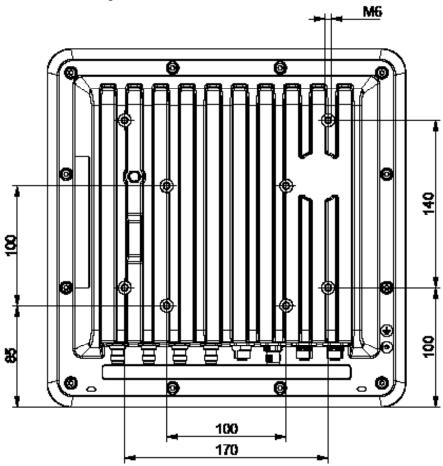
RRU 4xxx and ARU 3xxx dimensions, rear view
